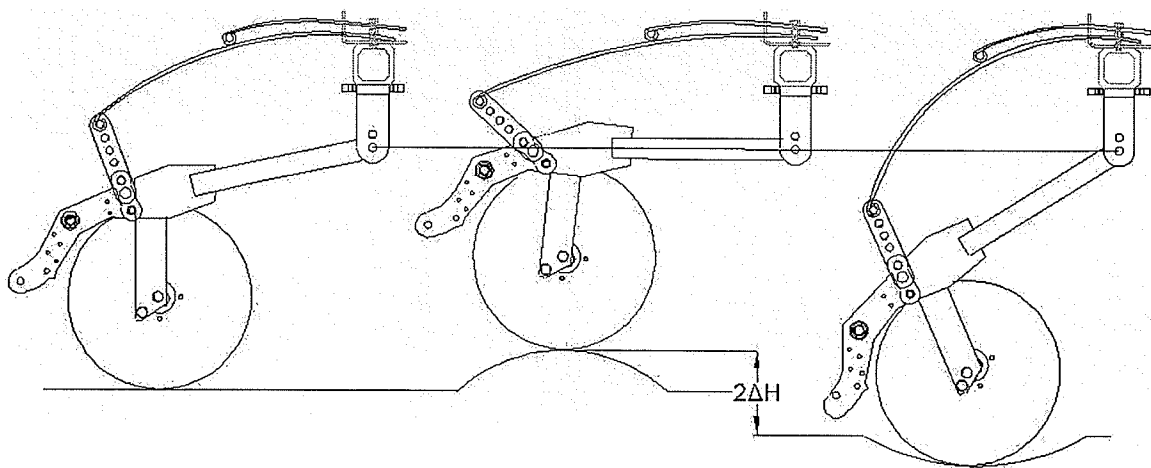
Position and dimension changes of the leaf spring downforce system when the opener disk running under normal field elevation, encountering a field obstacle, and entering a field depression; $2\Delta H$ is the total field elevation change.
